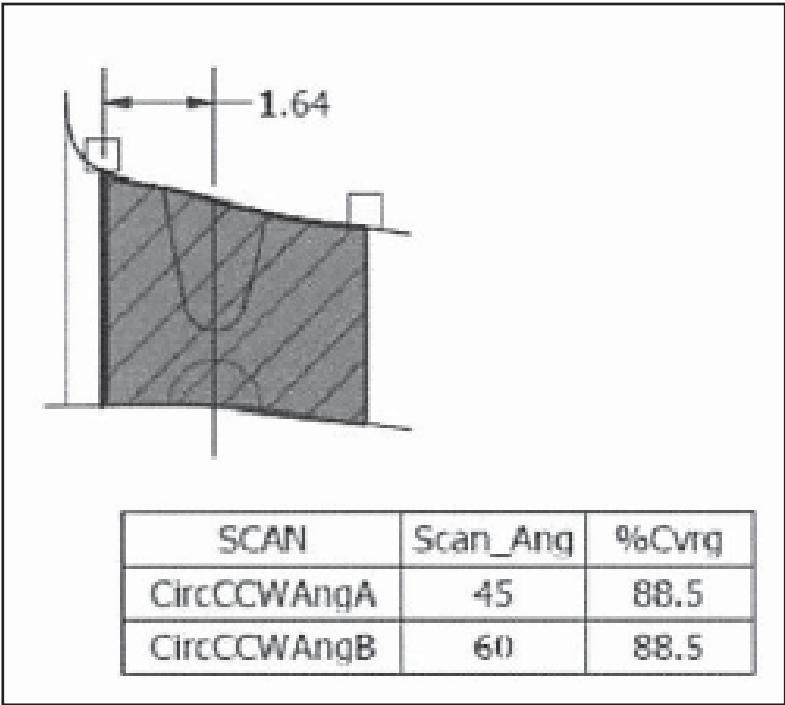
Weld RCW-15, 45° & 60° CCW Circumferential Scans
